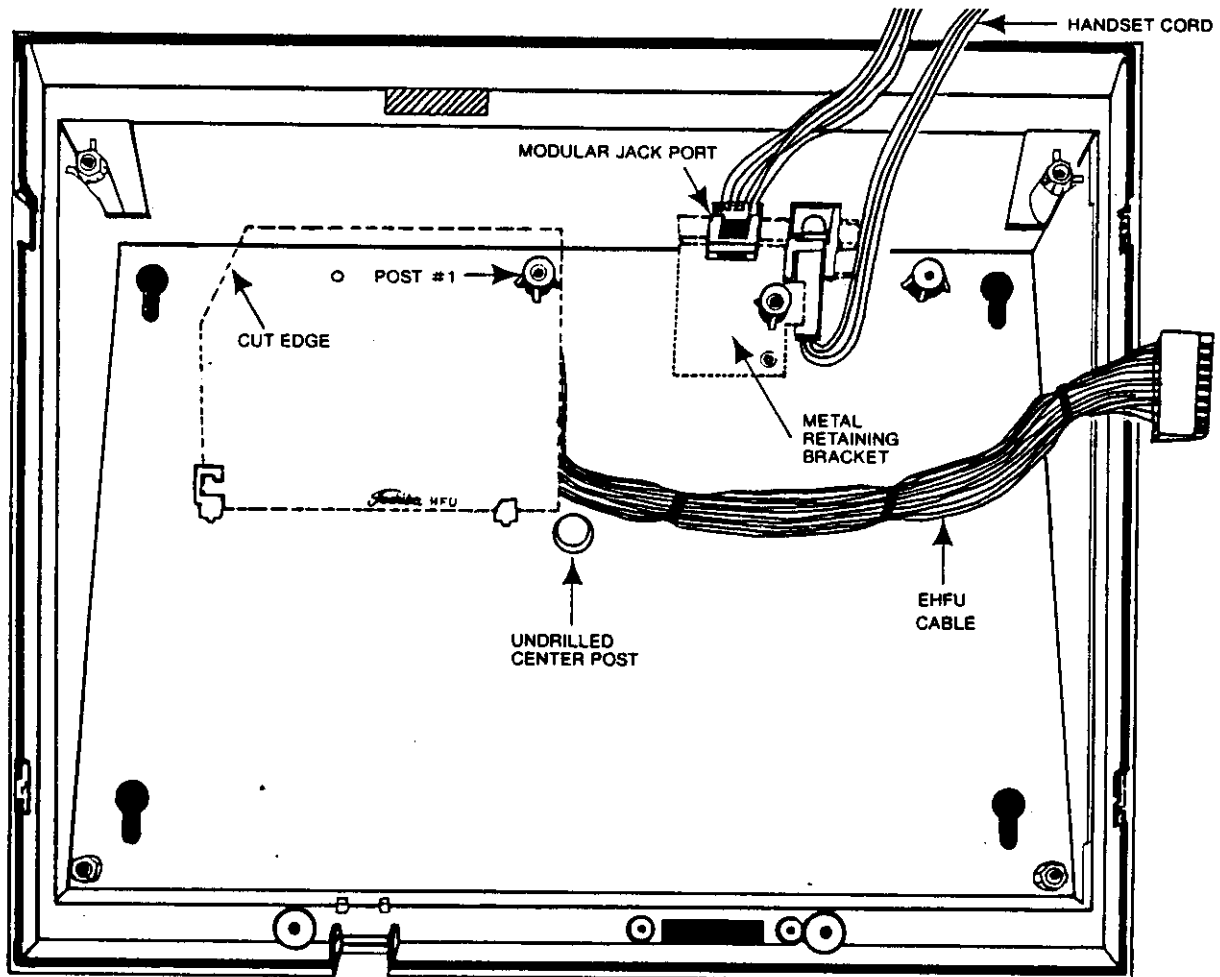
PLACEMENT OF EHFU PCB IN EKTW
